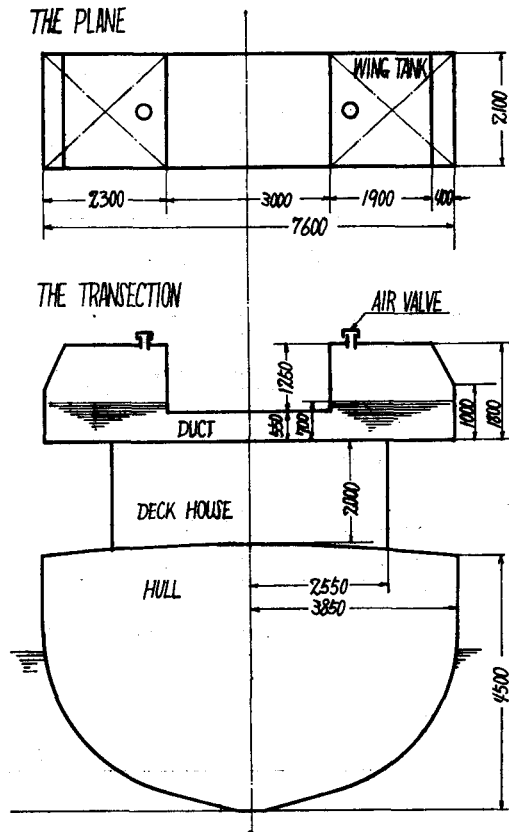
Rough drawing of anti-rolling tank on Shikine
